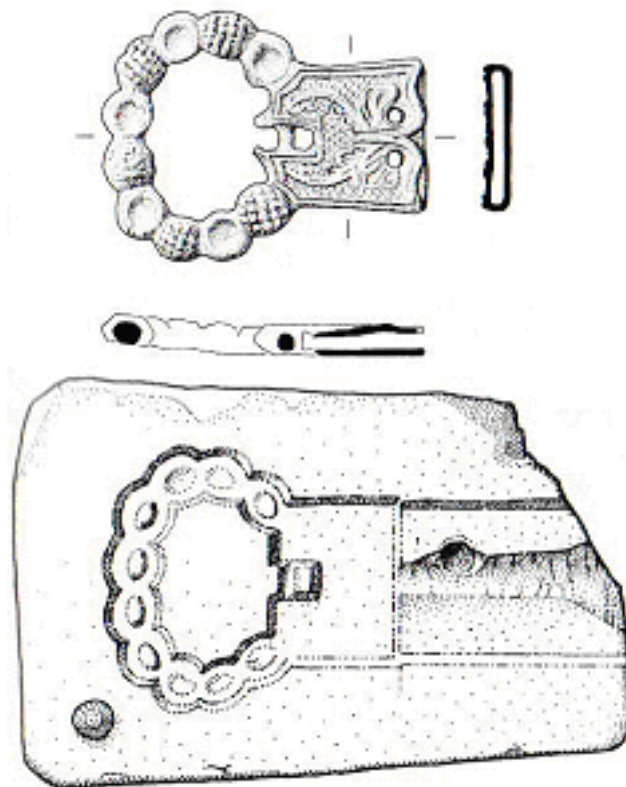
Example and Mold of Buckle w/ Integral Plate (Egan, 66-67)
